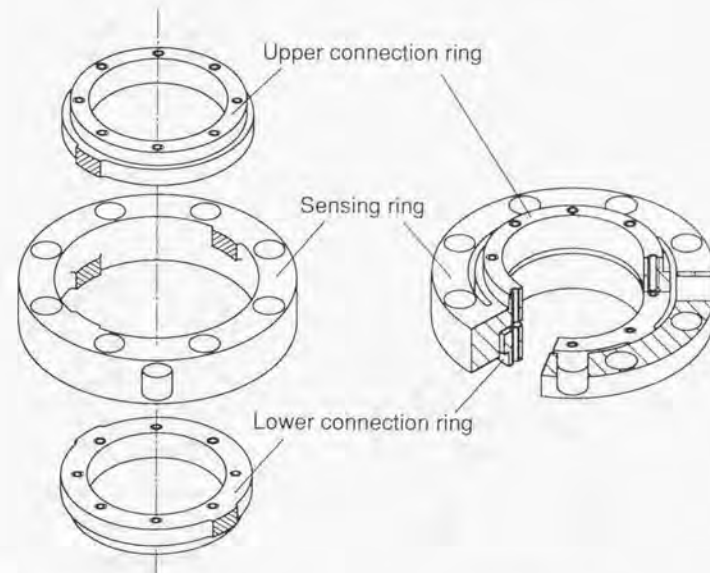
Basic structure of ring-shaped 6-axis force sensor
